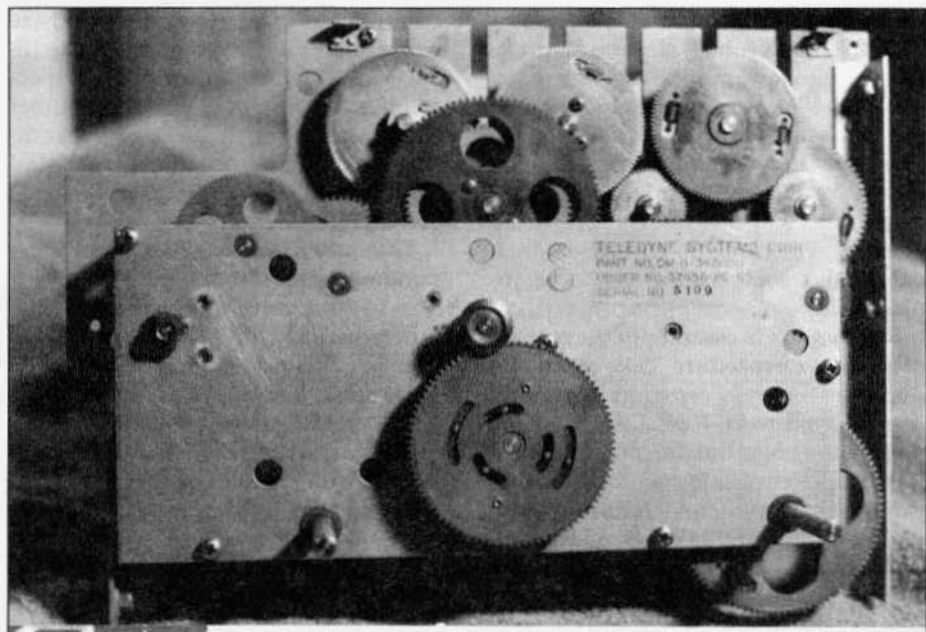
The large gear and dial lock on the Kilocycle Change shaft has been removed.
